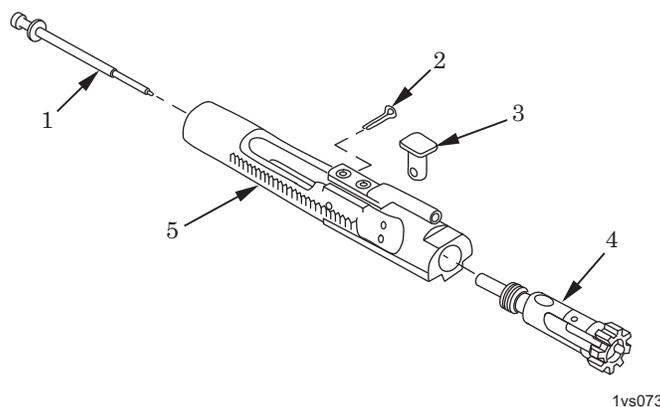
Assembly of Bolt and Bolt Carrier Assembly.
